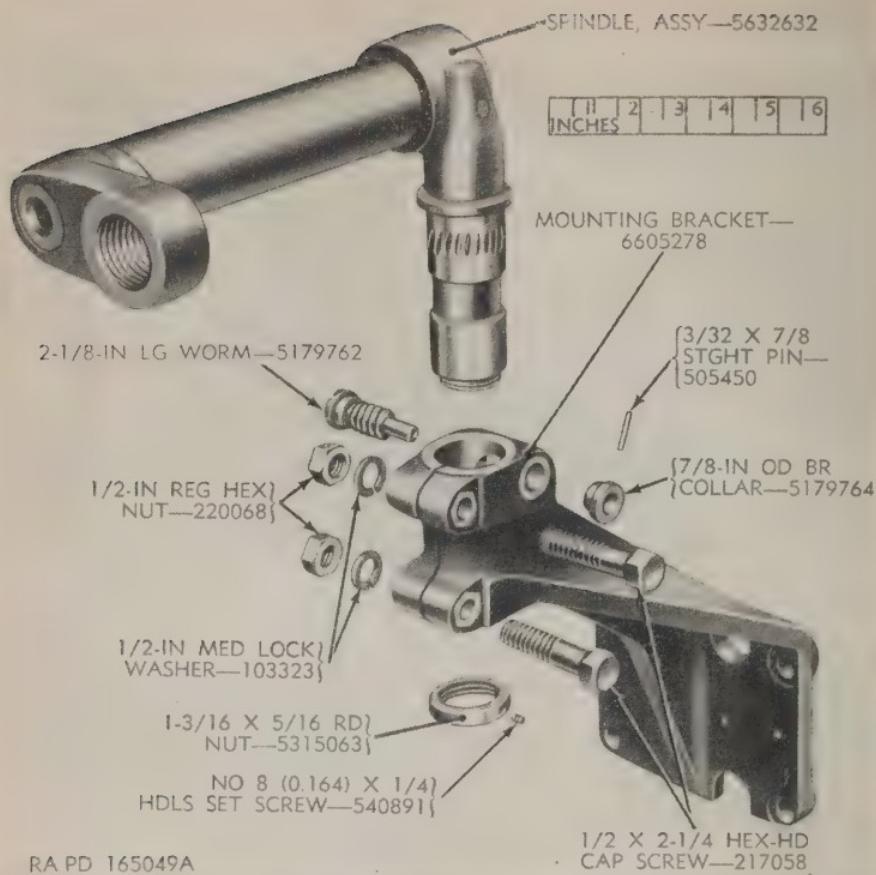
Telescope mount M54—removal of the spindle assembly and related parts—exploded view.
